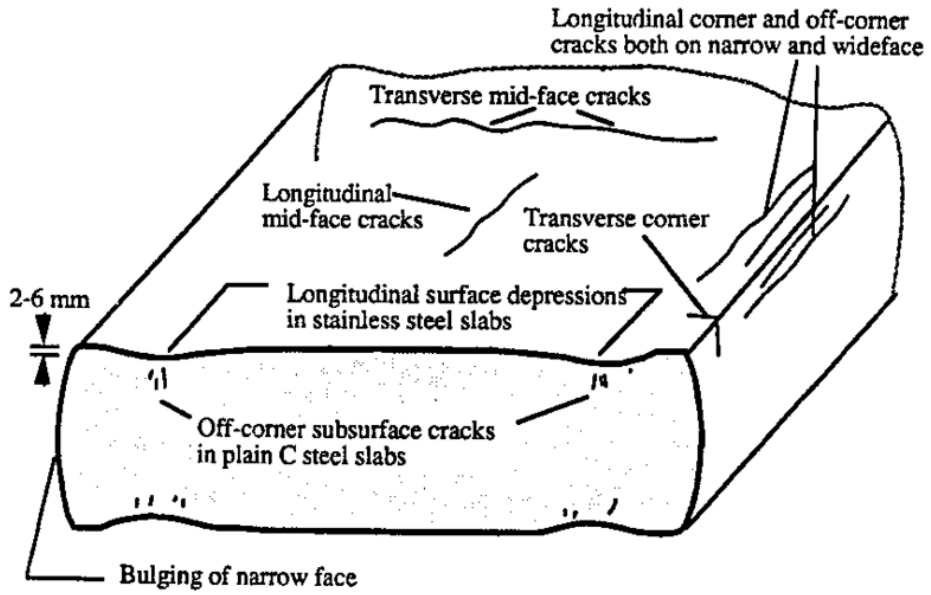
Schematic diagram of surface defects during continuous casting process.[4]
